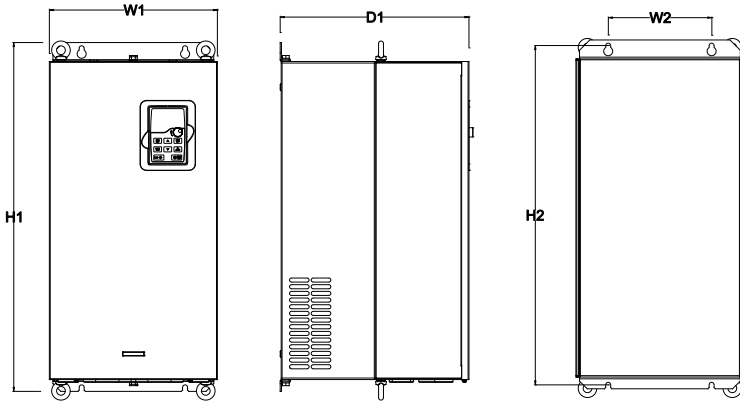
Wall installation diagram for 660V 22kW–132kW VFD models
